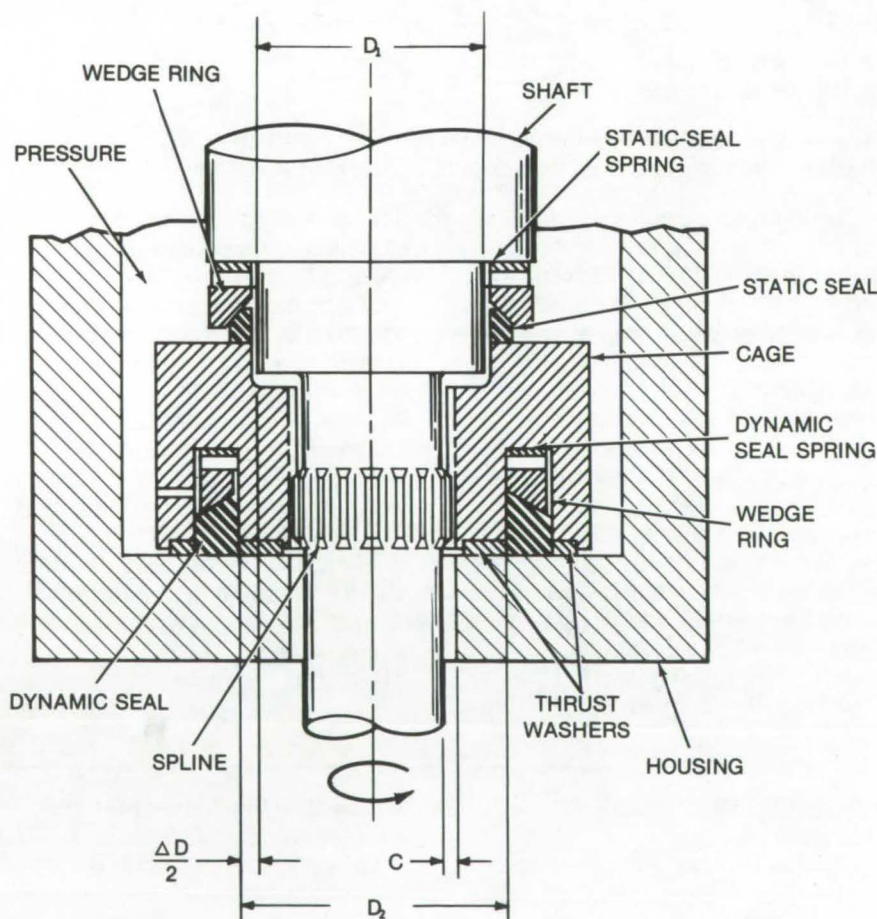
The Journal-Bearing Shaft Seal has a cage that is spline keyed to the shaft and provides a strong metal body for the two polymer seals.
